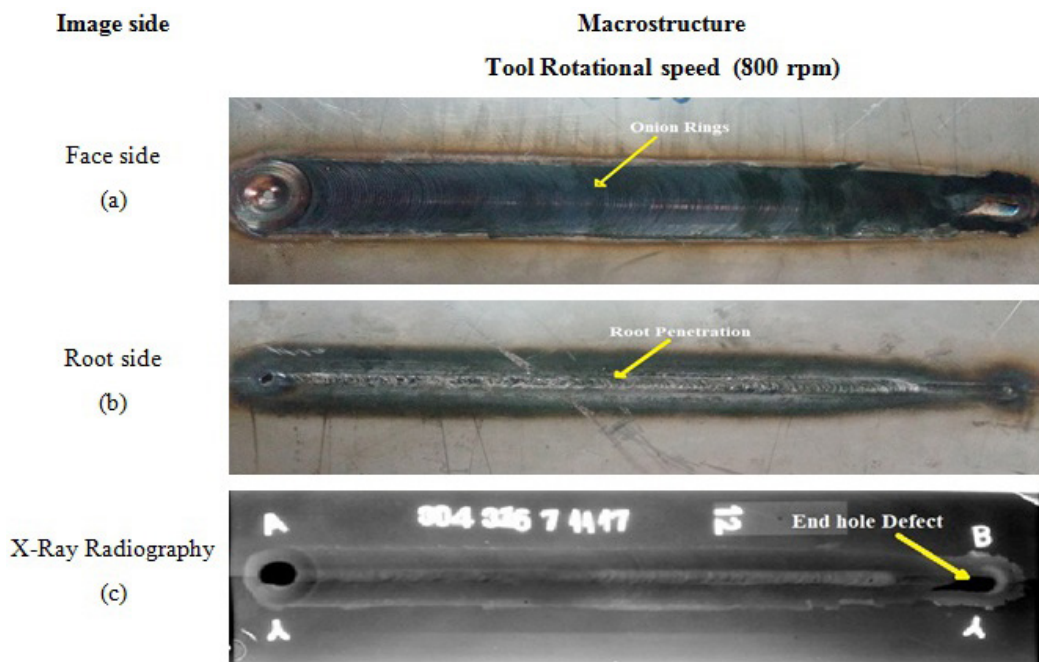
Visual inspection and X-ray radiography images of a FSW joints.
